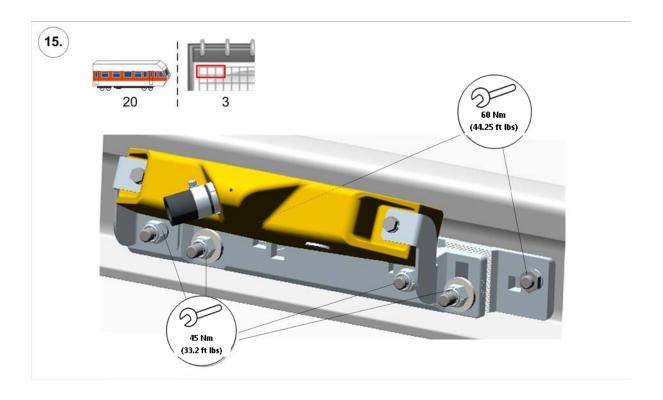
Checking Clearances and Re-securing Hardware on Option A3 Mount
